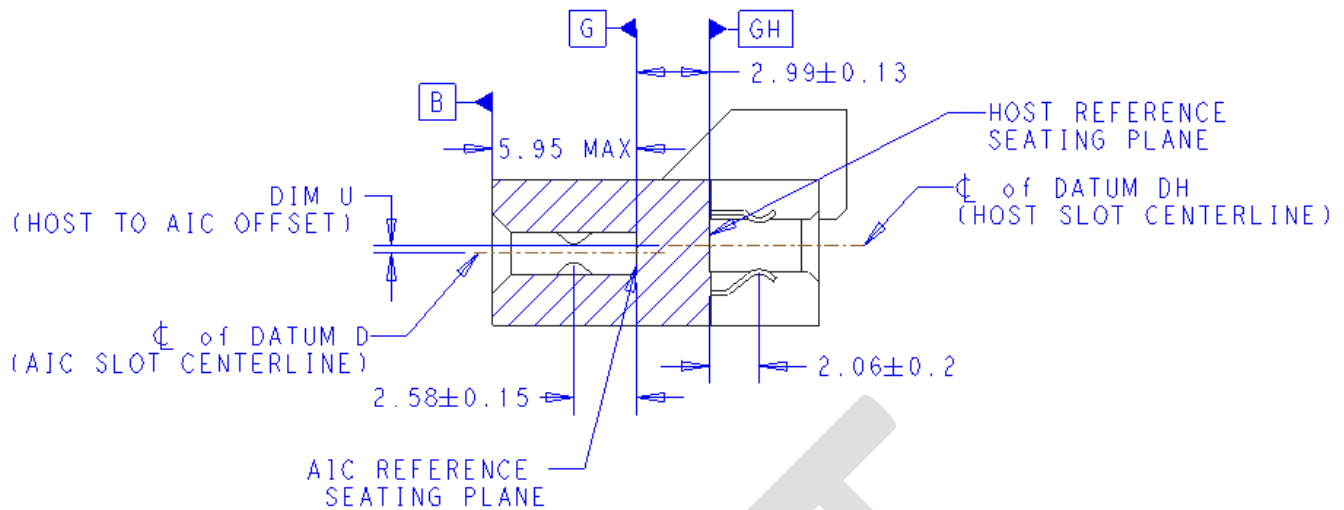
SECTION A: STRADDLE MOUNT CONNECTOR SEATING PLANE DIMENSIONS (MM)
